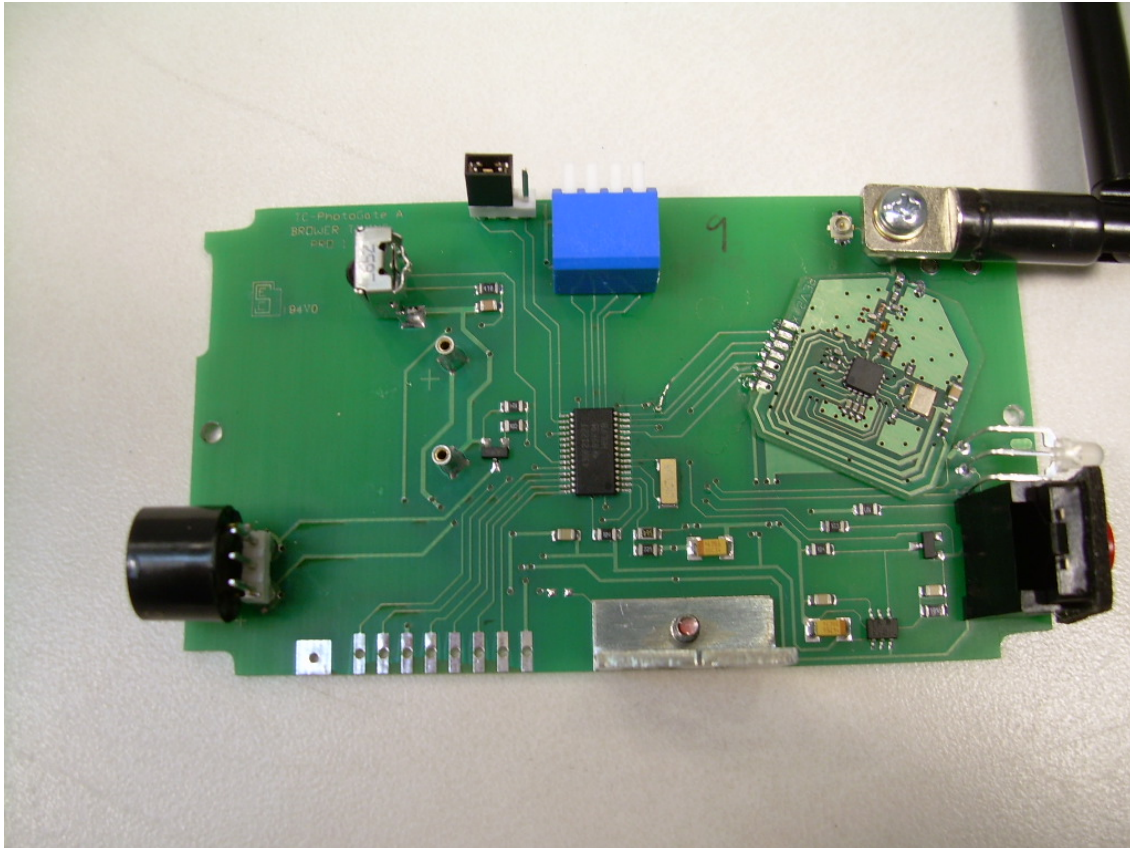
View of the TC-PhotoGate A with Housing Removed
